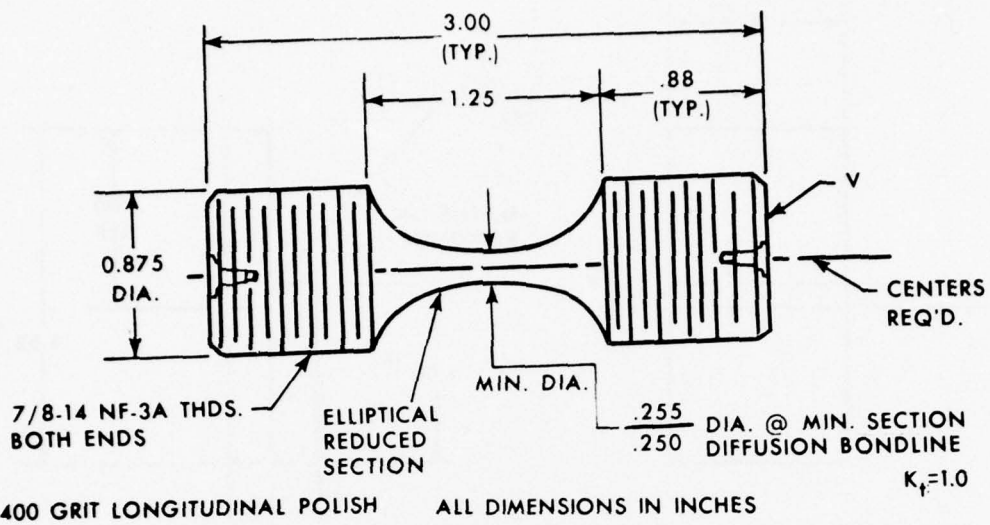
AXIAL CRACK INITIATION FATIGUE SPECIMEN UN-NOTCHED, ELLIPTICAL REDUCED SECTION.
